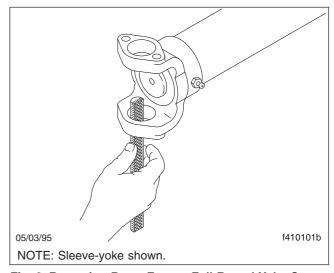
, Removing Burrs From a Full-Round Yoke Cross-Hole
